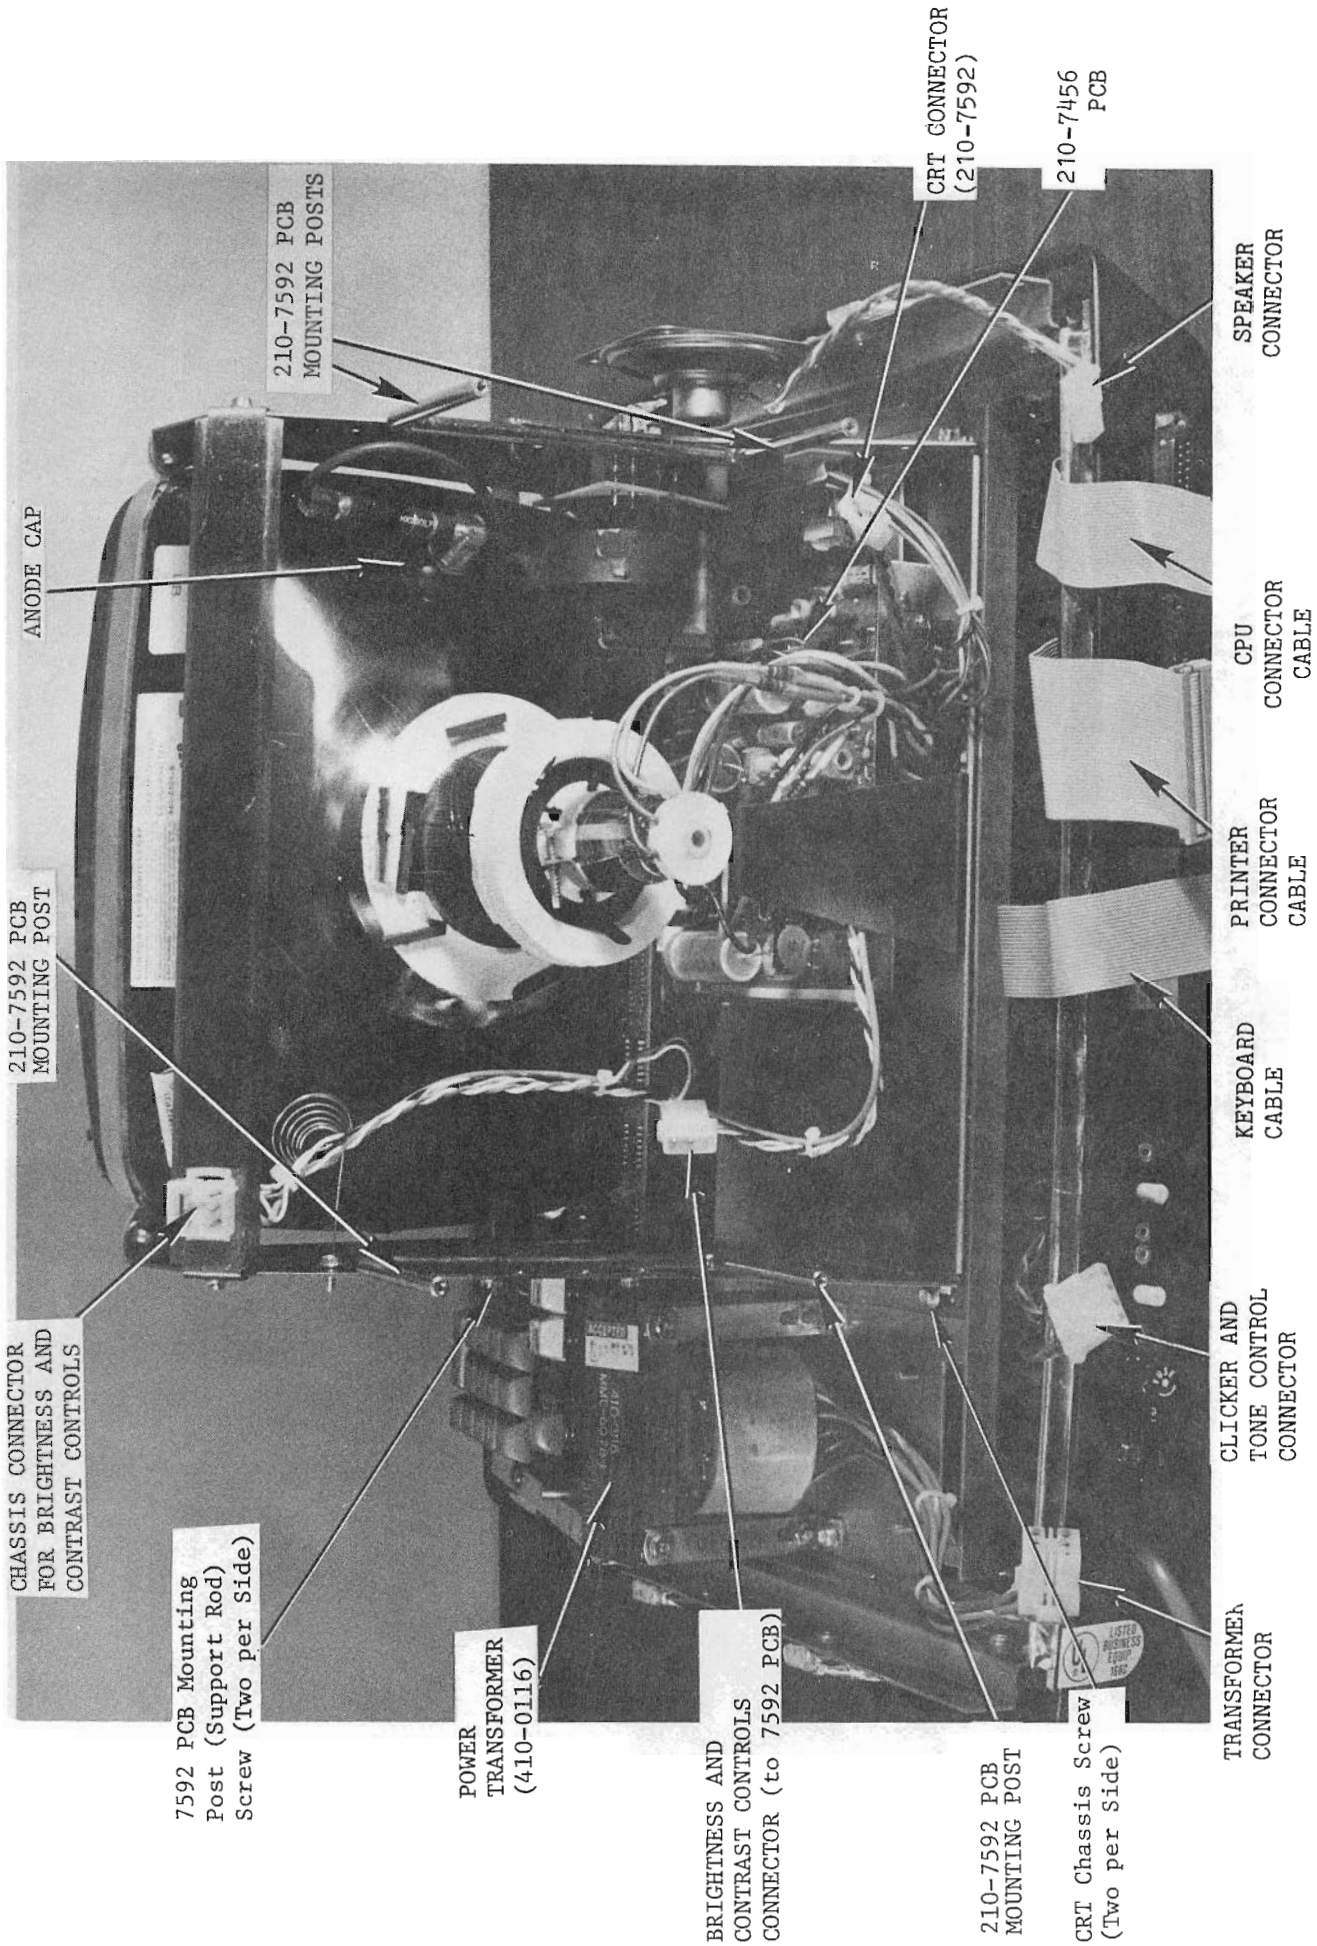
Rearview of Chassis with 7592 PCB Removed
